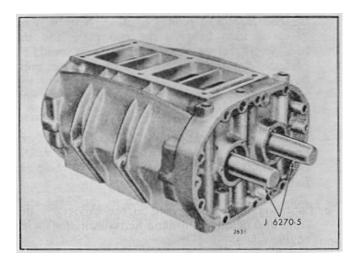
Assembling Blower Rotors in Housing and Front End Plate with Oil Seal Pilots
